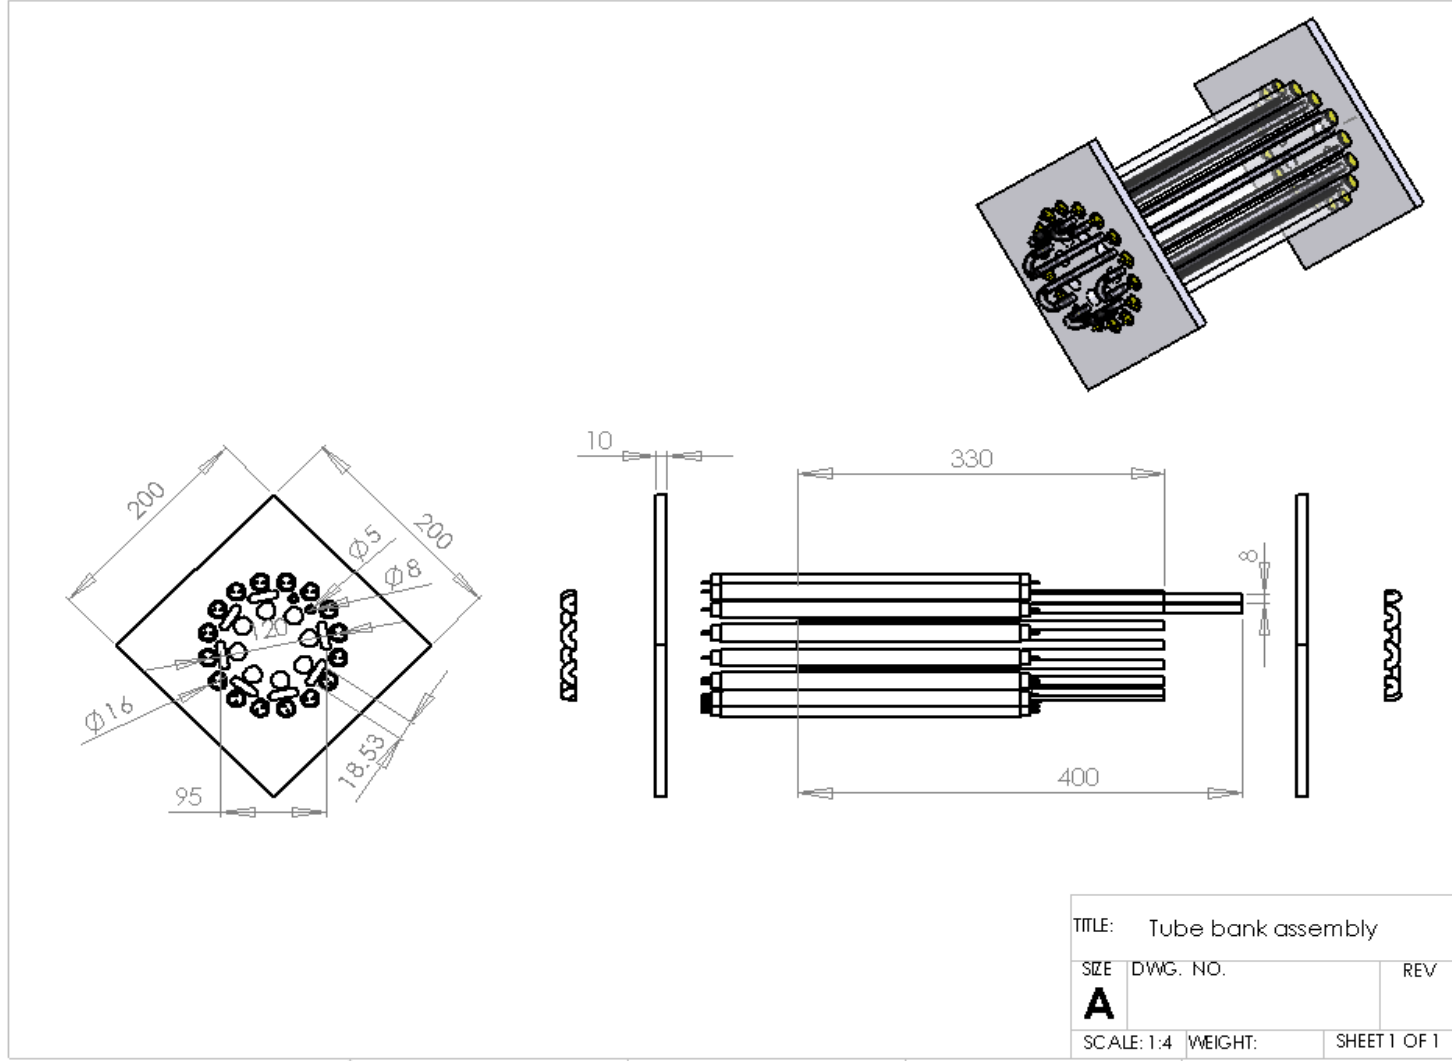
Engineering drawing of UV grafting reactor showing critical dimensions
